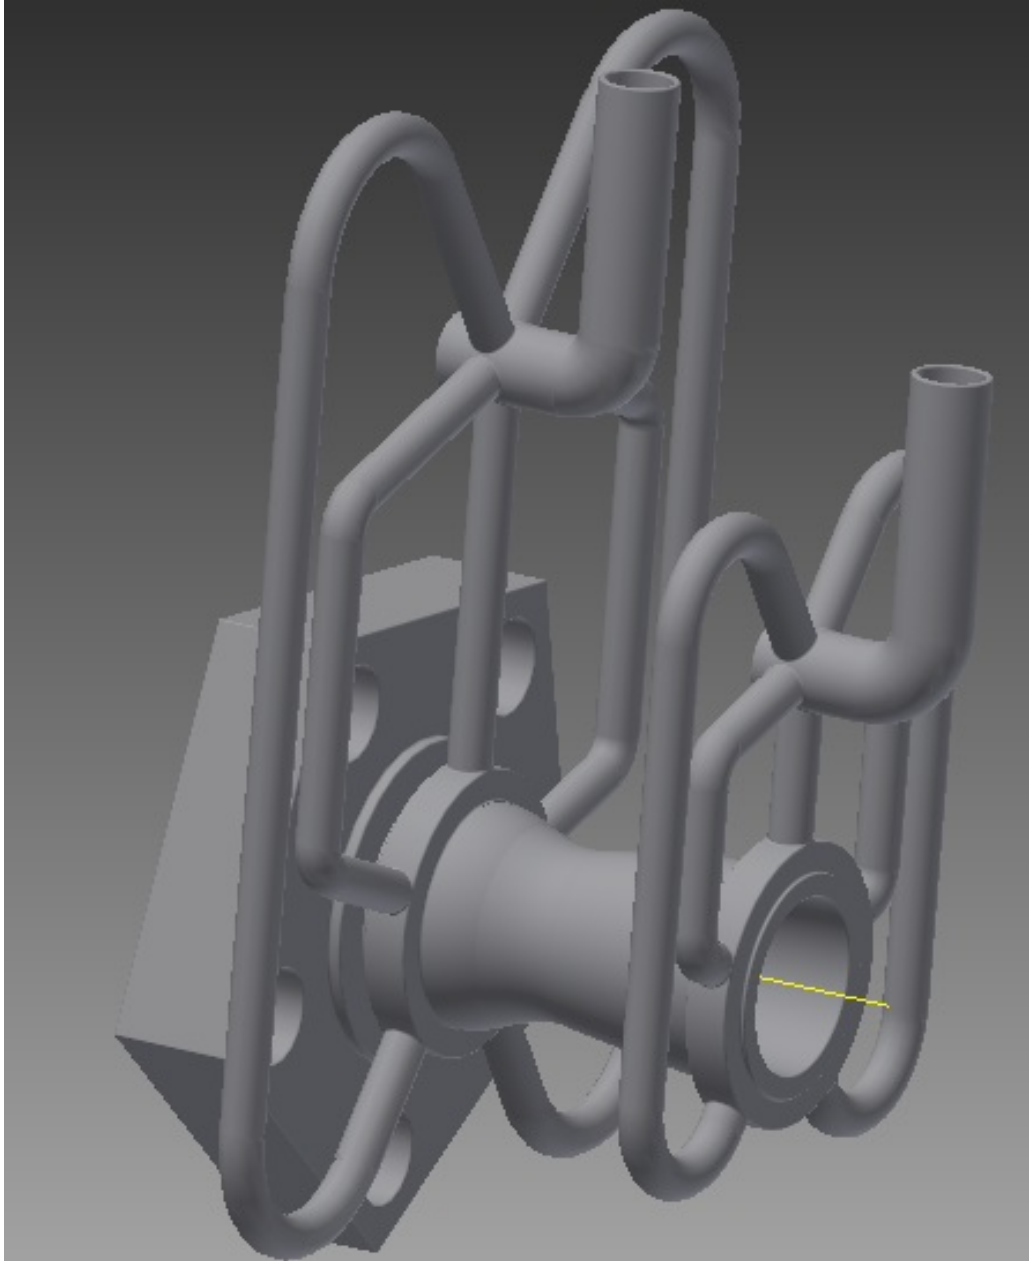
Initial Cooling System Manifold Design with integrated One-to-Five Manifolds
